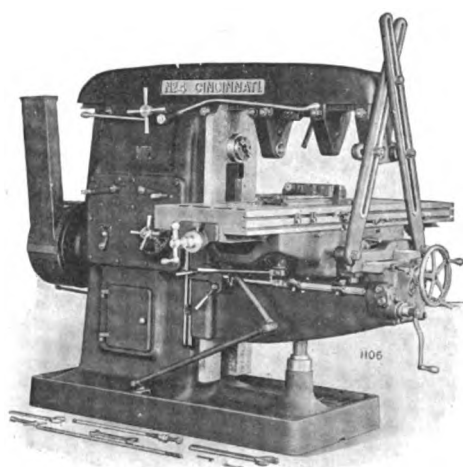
Nos. 4 and 5 Plain High Power Millers
